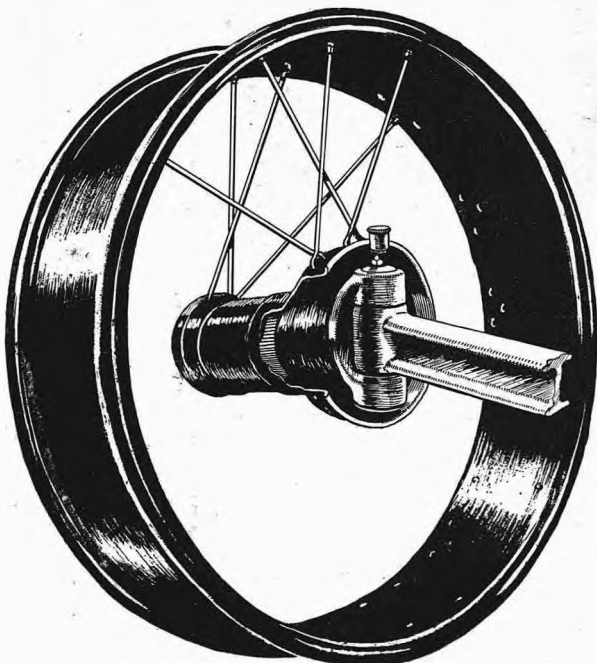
Sketch of the main parts of the R.W. wheel.
